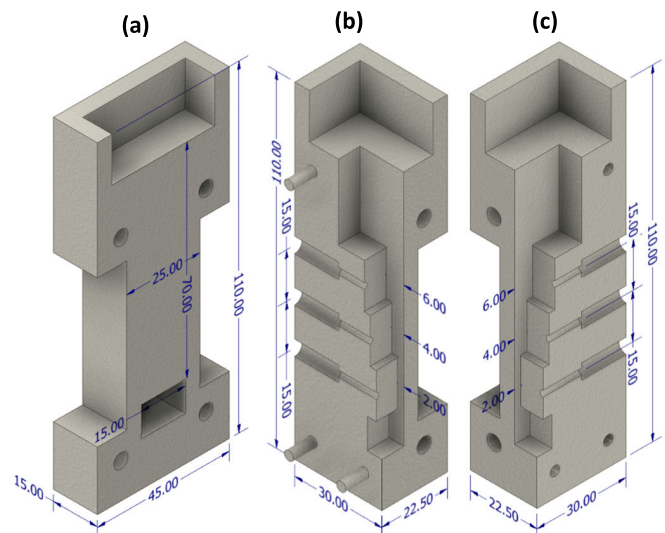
Three-dimensional model of flux mold with illustrated dimensions. (a) Front component. (b) Left half of back component. (c) Right half of back component.
